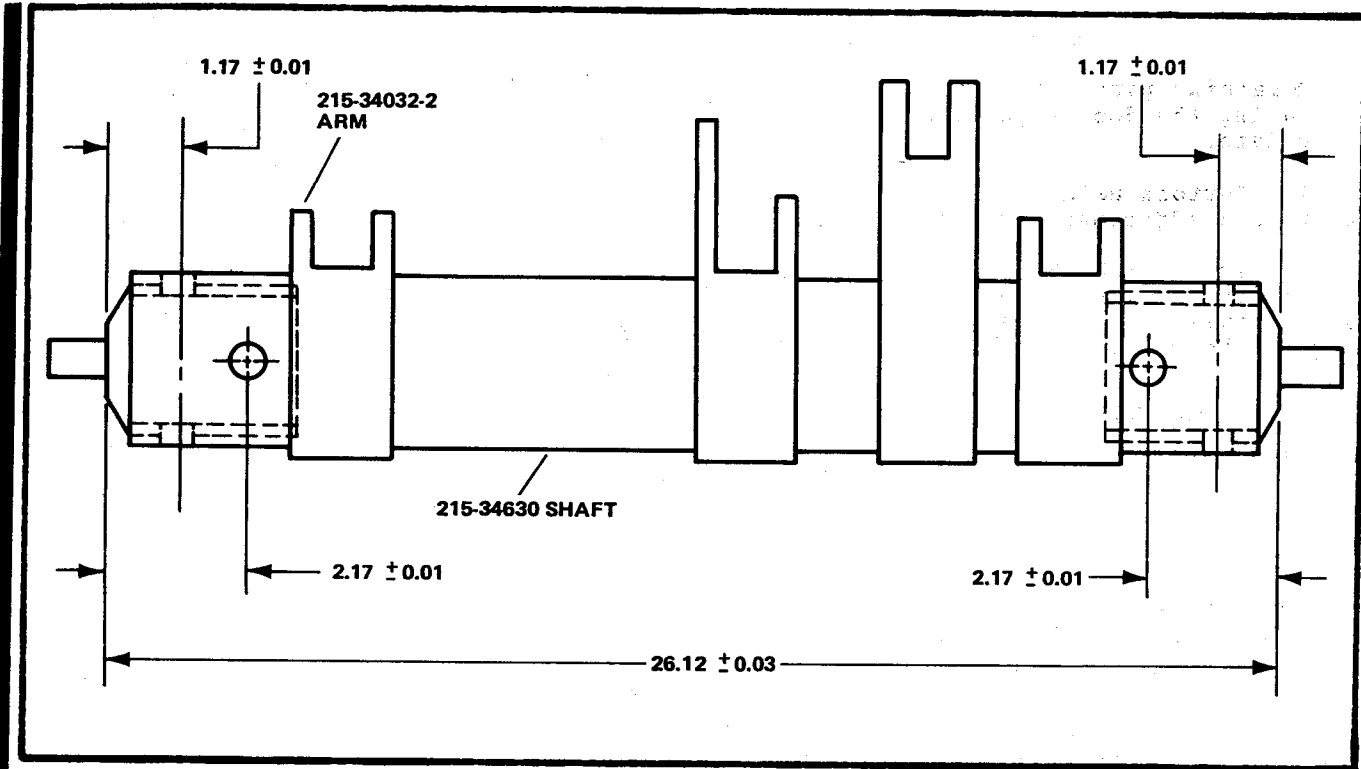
A. Support Cap Assembly, Part No. 215-34031-1
